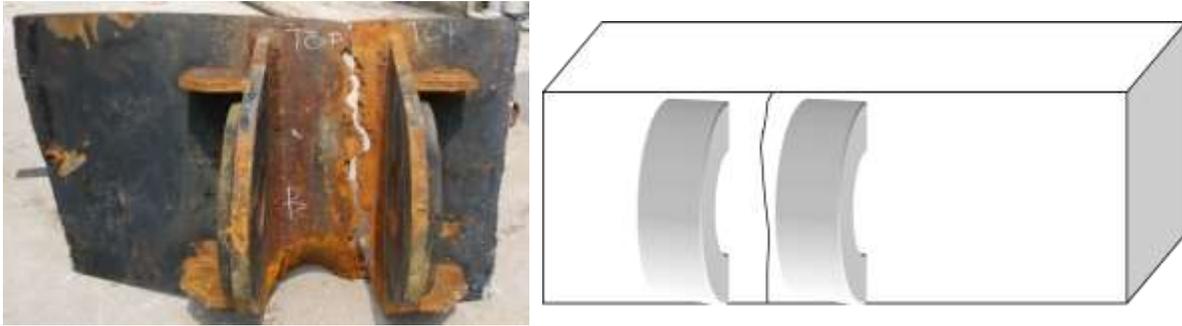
(a-left) Failure in the plate between the spindle flanges, (b-right) Schematic diagram showing the failure in between the spindle support flanges. Spindle is bolted across the flanges. Bolt was missing. No damage observed to the holes in the flanges
